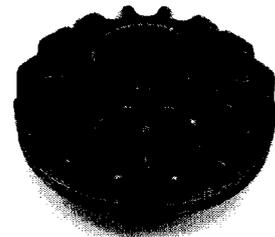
Bevel gear forged with the JIS 3 grade die (Product 1)
